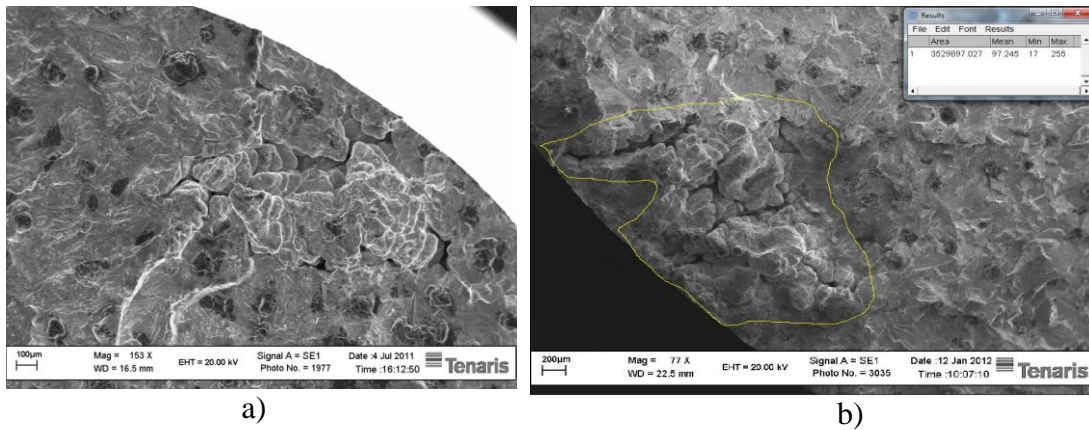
Typical fracture surfaces on specimens containing microshrinkages porosities: a) specimen under pure axial load; b) specimen under multiaxial loads.
